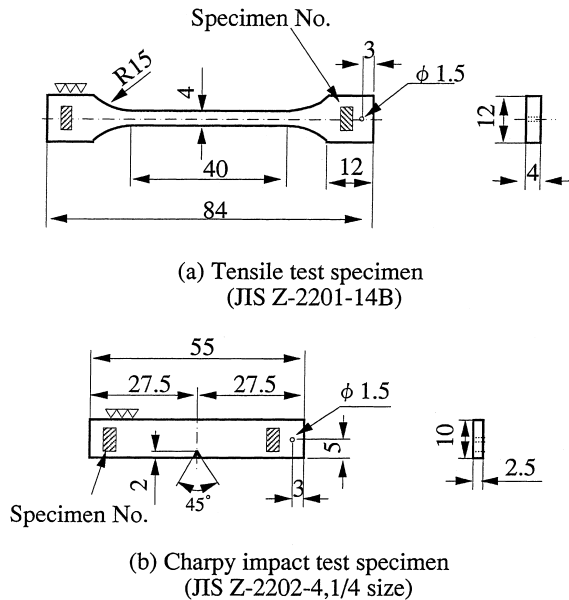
The geometry of tensile and Charpy impact test specimen (dimension in mm).
